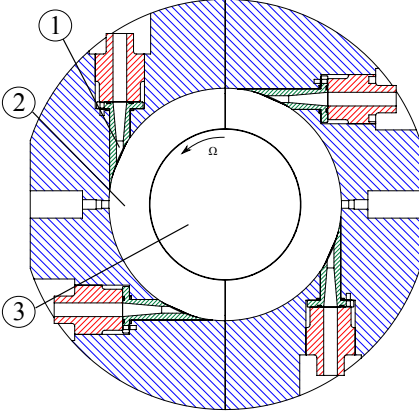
Cross section of the seal house at the inlet cavity section. ① inlet injection nozzle, ② inlet cavity, ③ shaft. The figure is adapted from [21]
